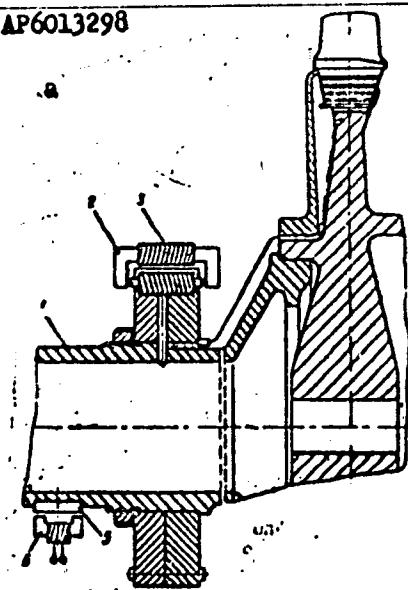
1 - machine shaft; 2 - magnetic connection; 3 - fixed electromagnets; 4 - magnetic screen; 5 - spline-like protrusion; 6 - auxiliary magnet
